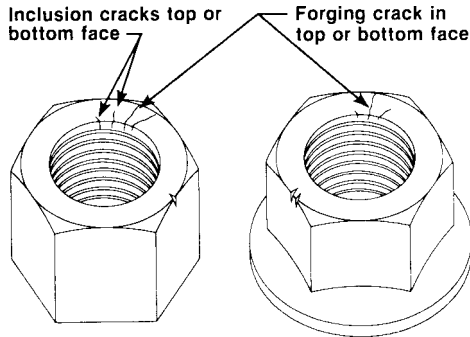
Typical Forging and Inclusion Cracks in Nuts
